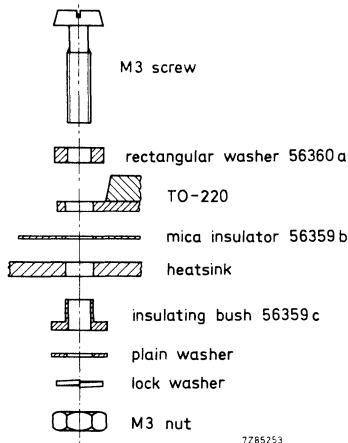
Insulated screw mounting with rectangular washer. Known as a "bottom mounting".
